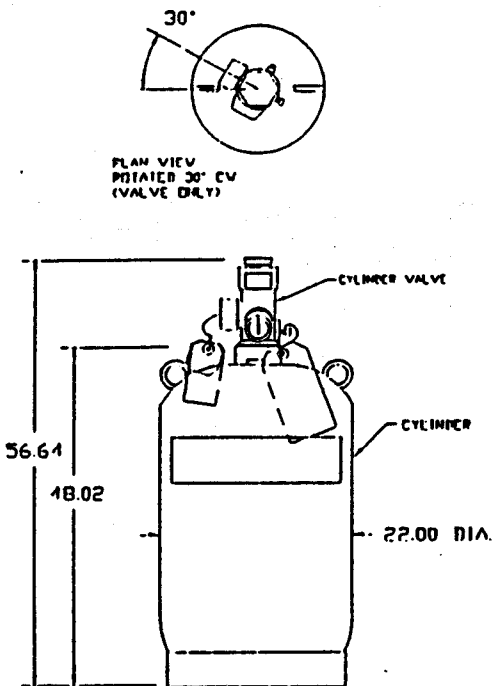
Halon 1301 Cylinder/Valve Assembly, 600 lb., without Liquid Level Indicator
